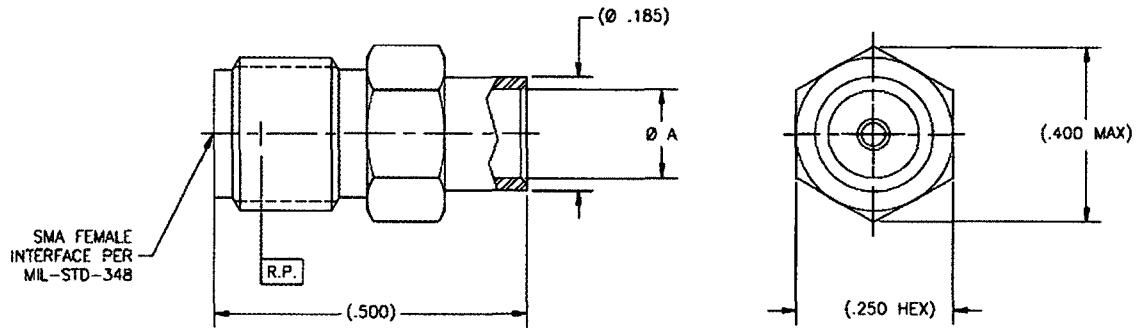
Mechanical Drawing of Female SMA Interconnect
